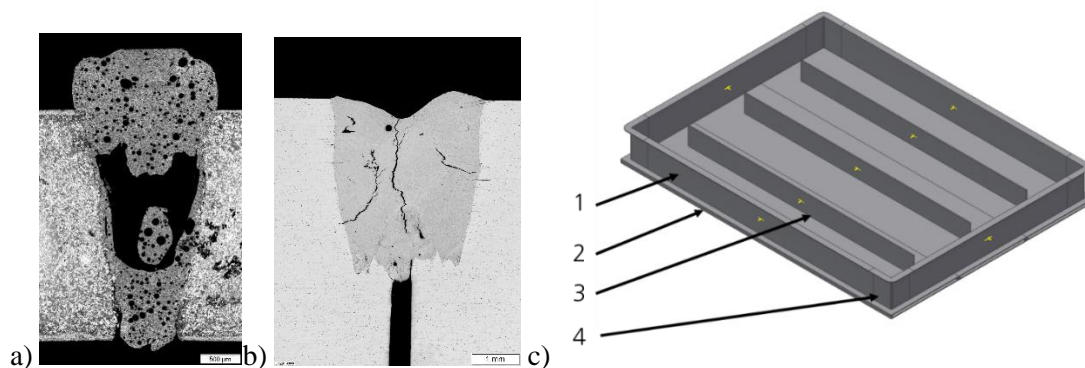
a) Battery housing with side profiles (1), bottom plate (2), profiles to increase stiffness (3), and die-cast nodes (4); b) Reference welding of aluminum die-casting AlSi9MnMoZr by using a static laser beam; c) Reference welding EN AW-6082 T6 with significant hot cracking
